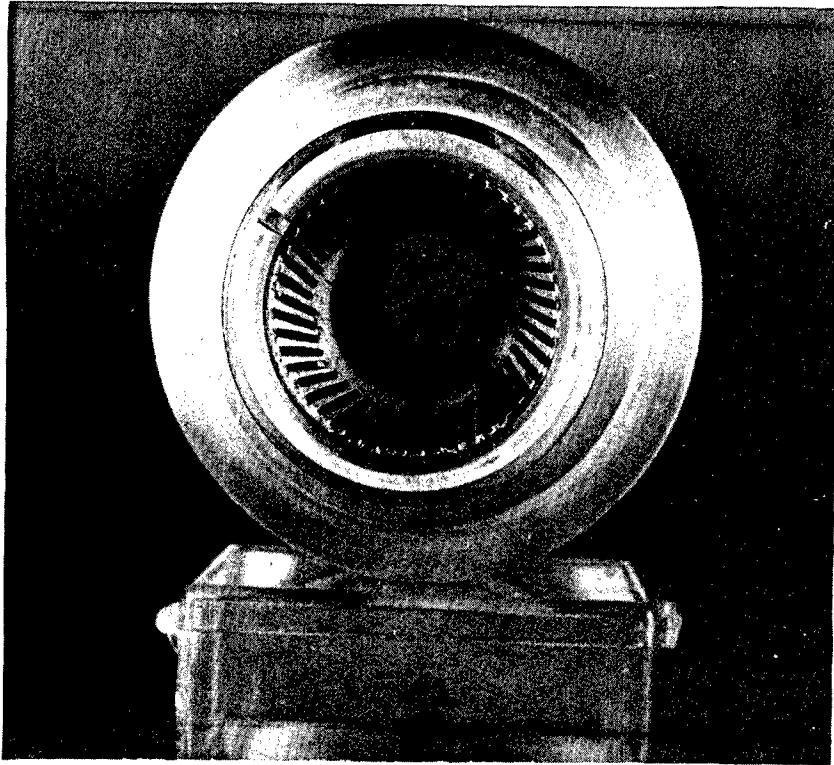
View Of Heat Exchanger Located In Bore Of No. 1 Journal Bearing
